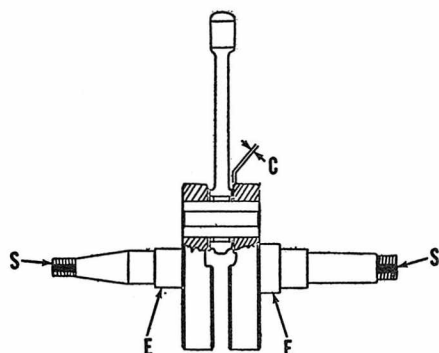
Crankshaft eccentricity at main bearing journals (E) should be checked with crankshaft supported at ends. Rod side clearance is shown at (C).
